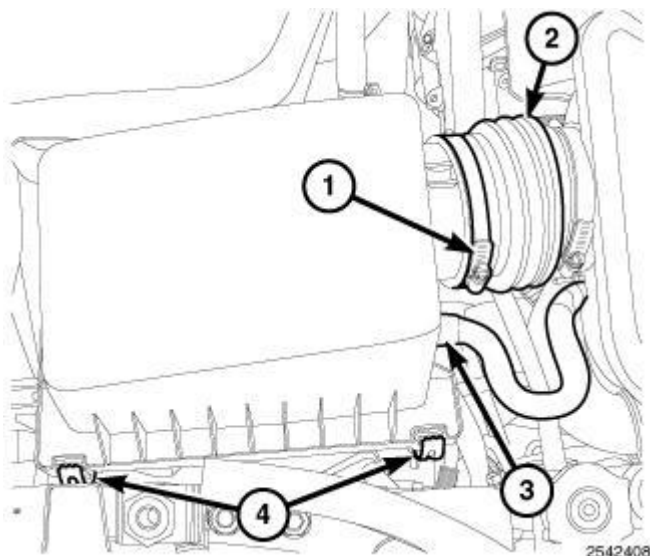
Air Duct Clamp At Air Cleaner Cover
